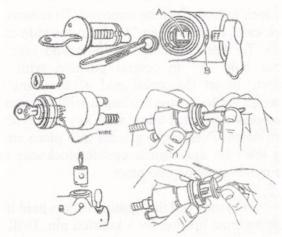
Various types of Baxco locks. Top: steering wheel, Left Center and right: coil types, Lower left: Ford steering wheel lock.
